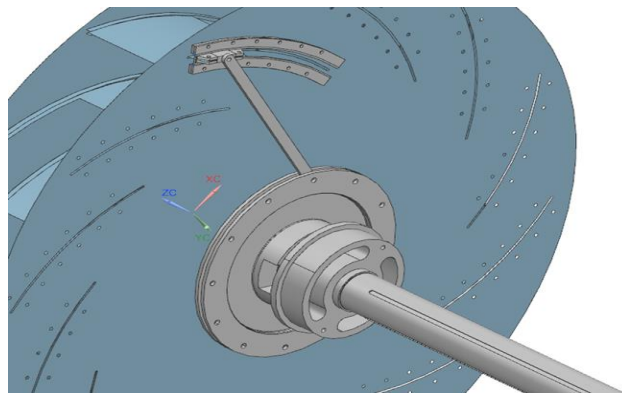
Geometrical model of the impeller with adjusting mechanism and shaft with the blade in the maximal position
